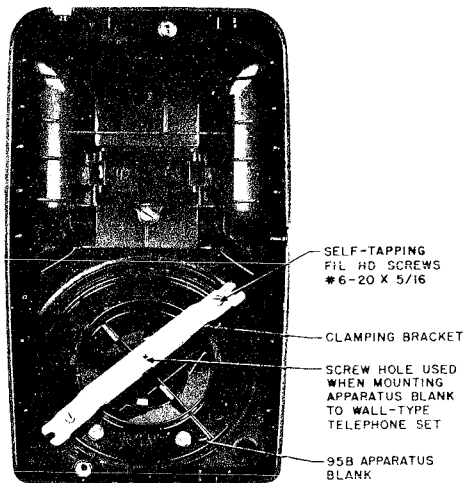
500-Type Housing with 95B Apparatus Blank, Interior
